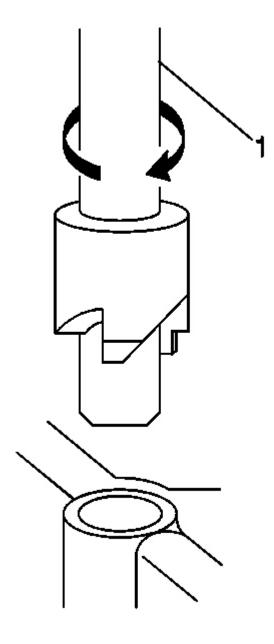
View Of Counterbore Drill Courtesy of GENERAL MOTORS CORP.
